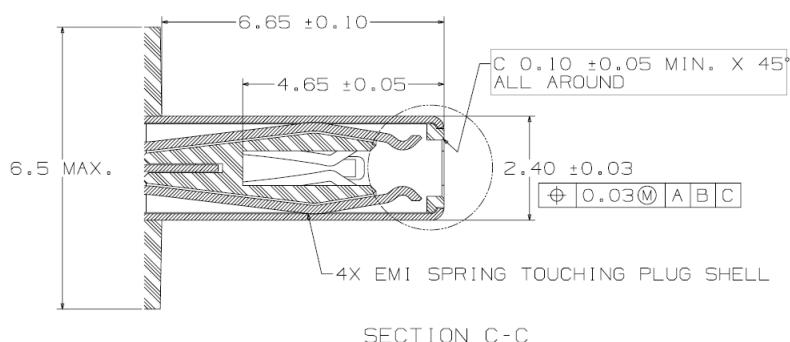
USB 2.0 Type-C Plug Interface Dimensions, cont.
